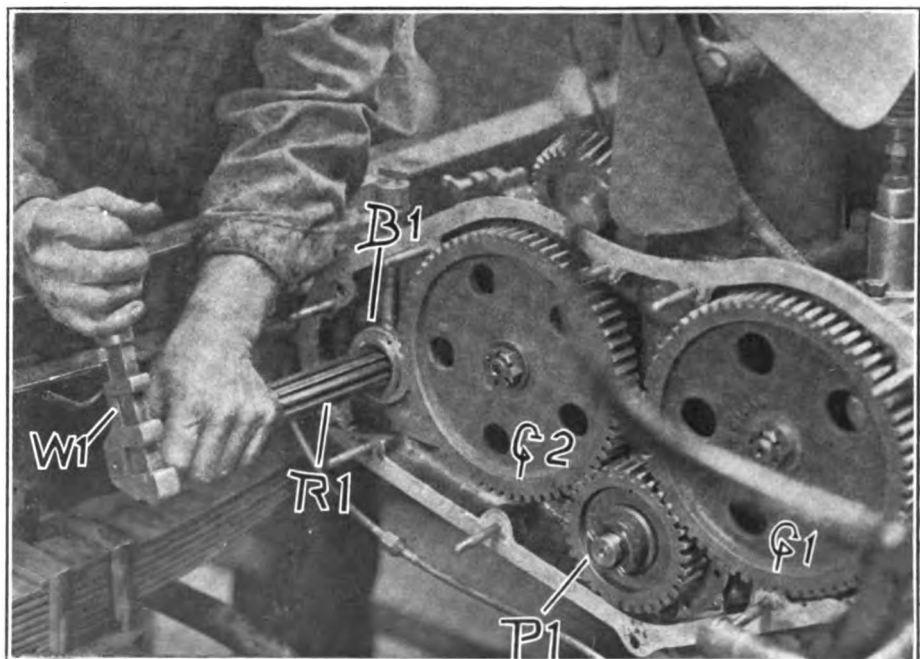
Reaming new bush for magneto shaft that has worn badly
